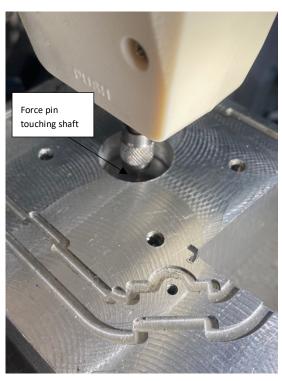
Testing fixture for shaft load proof test with counterbore for disk and shaft
